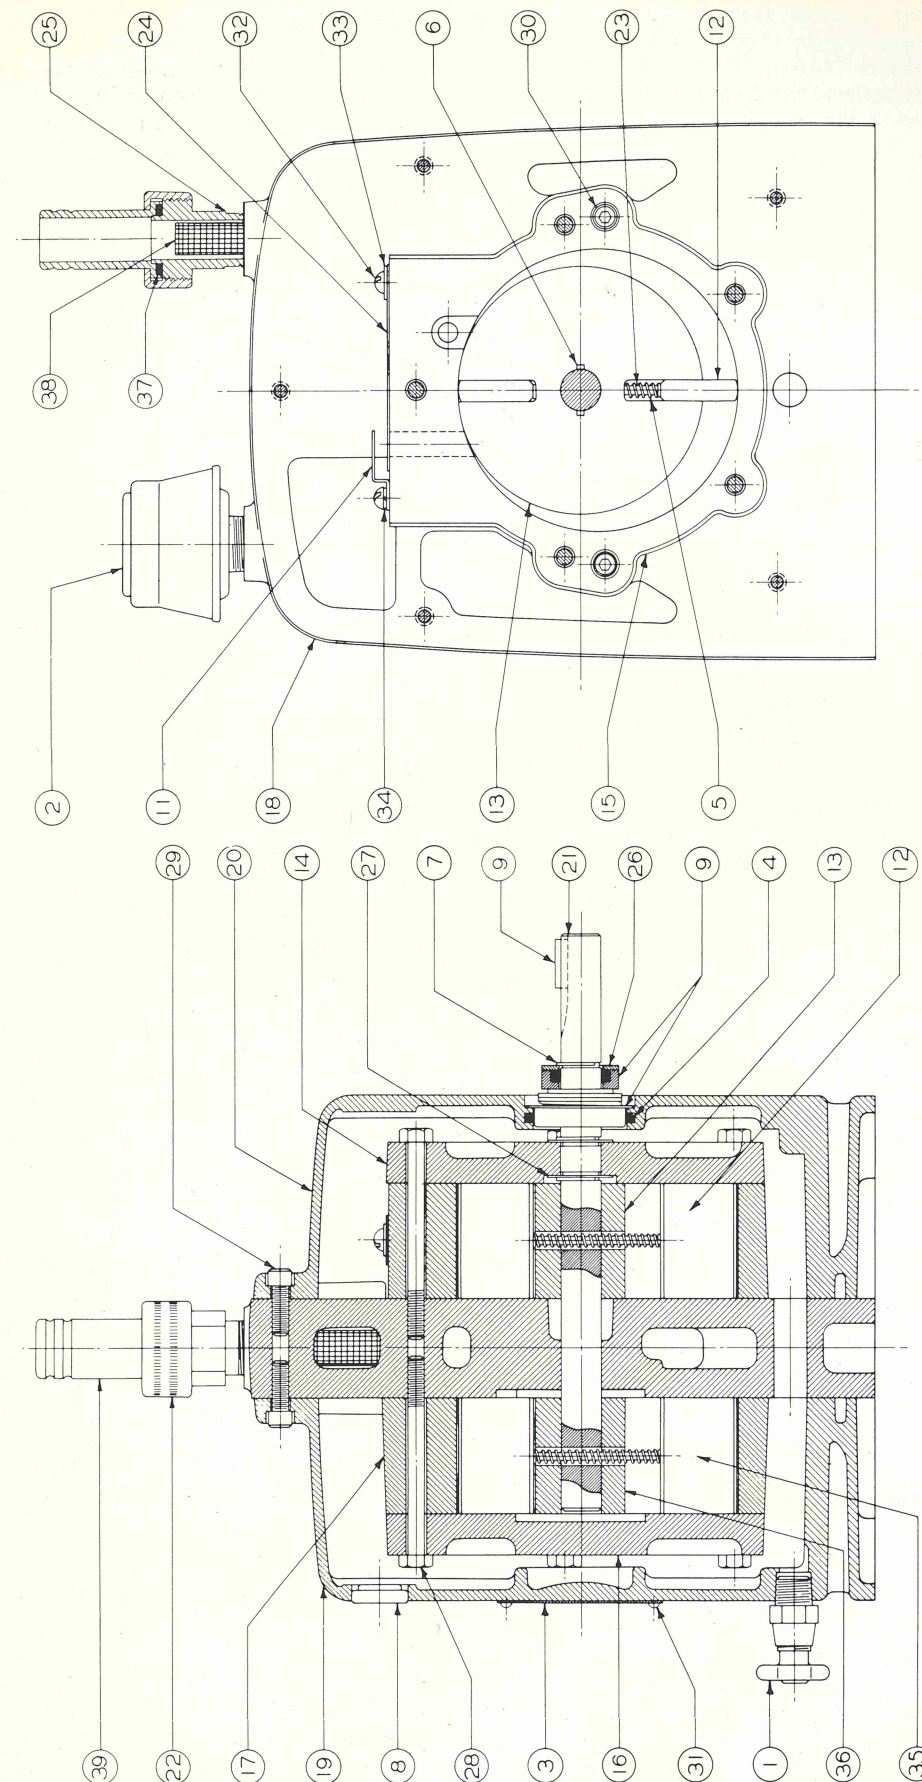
Sectional View of Hyvac 2, 7, and 14
